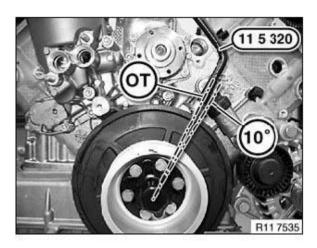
Identifying Special Tool (11 5 320) On Vibration Damper
